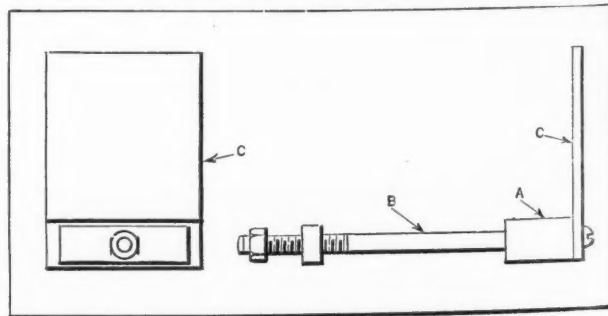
Attachment for Use in Setting Compound Rest for Duplicating Taper
